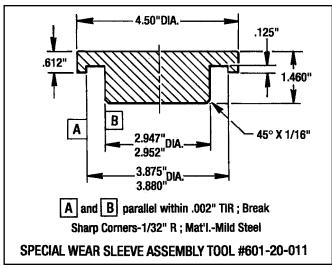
Wear Sleeve Assembly Tool (#20 Posidyne)
